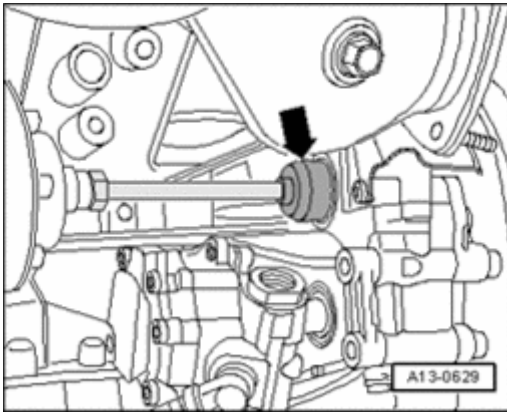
Sliding Dust Seal Cap Onto Shaft End Of A/C Compressor Drive Spur Gear
